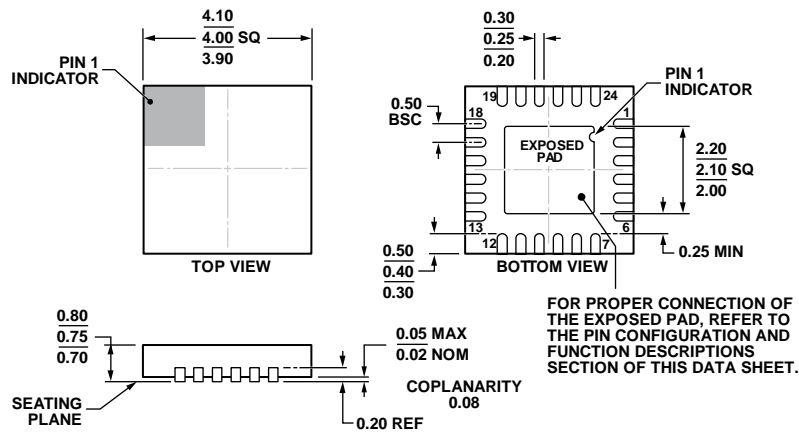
24-Lead Lead Frame Chip Scale Package [LFCSP]
